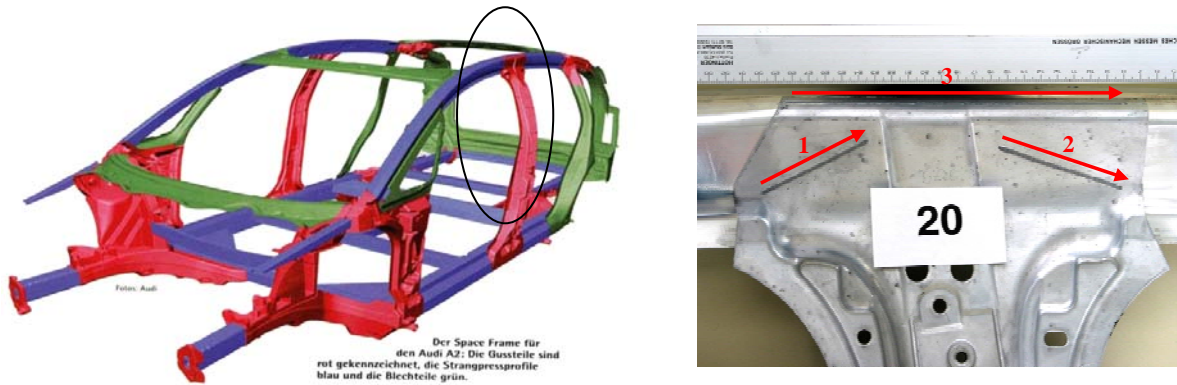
Space frame structure of AUDI A2 and detail of connection between B-pillar and roof profile
